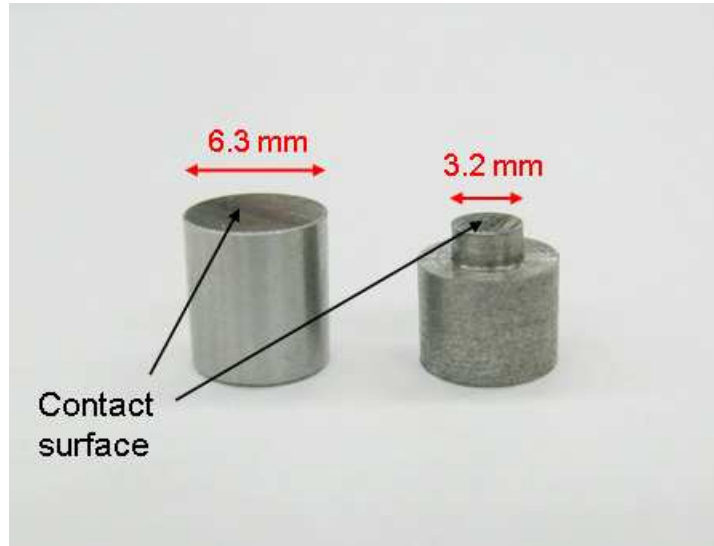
Photographs of the cylindrical pins. The 6.3 mm diameter contact surface is considered as “standard” size and the reduced diameter (3.2 mm) pin enables higher contact pressures.
